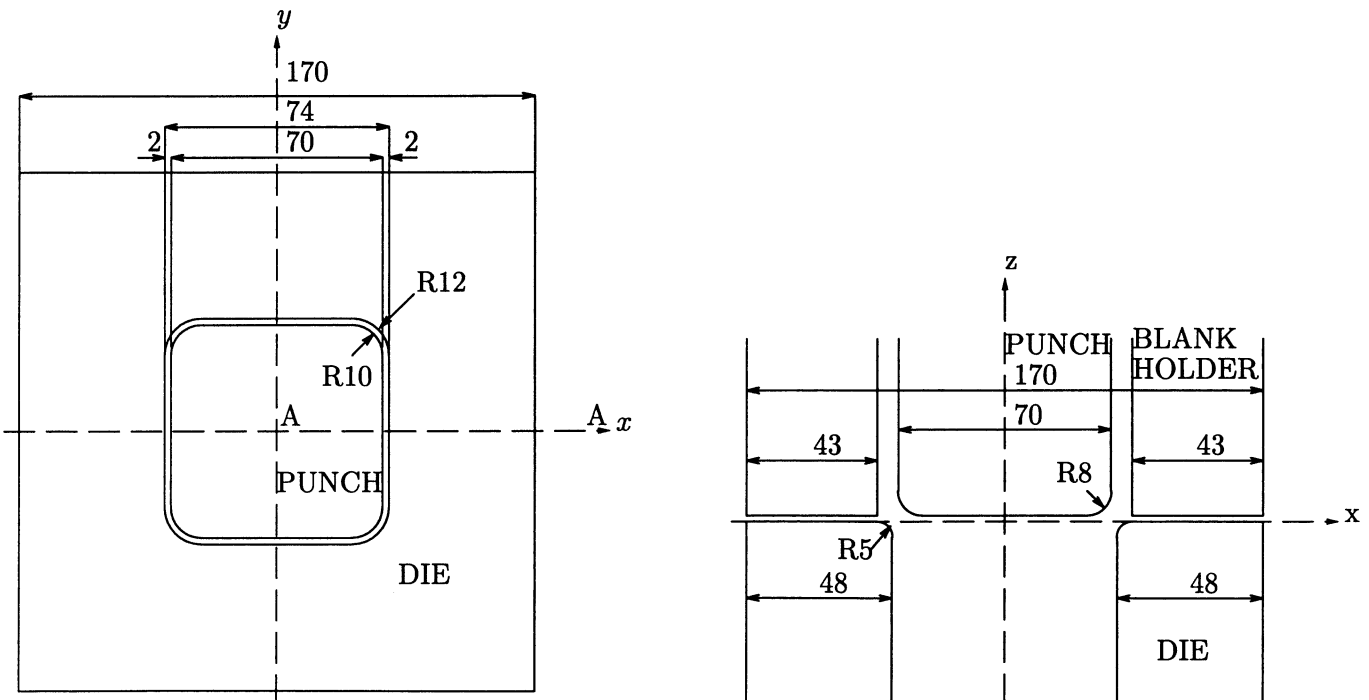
Geometry of the square cup deep drawing example. Left: The top view. Right: The side view. The geometry corresponds to the Numisheet'93 Benchmark: Square cup deep drawing [94].
